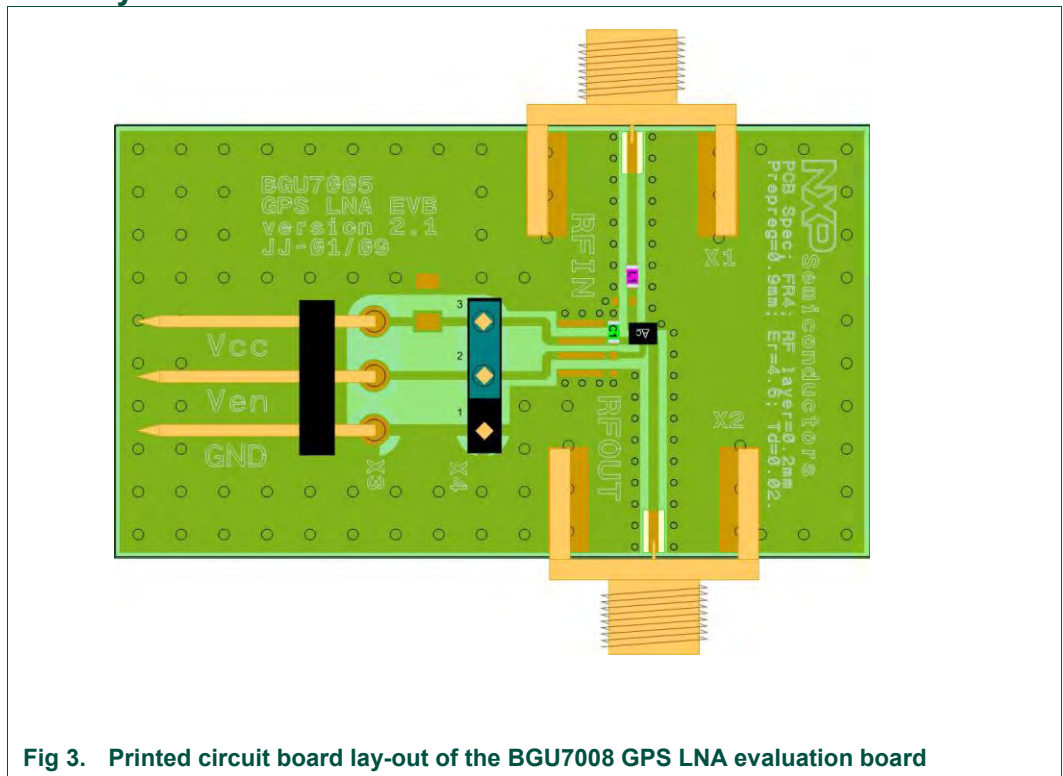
Printed circuit board lay-out of the BGU7008 GPS LNA evaluation board
